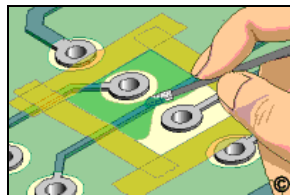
Epoxy can be used to replace damaged coatings and solder mask.
